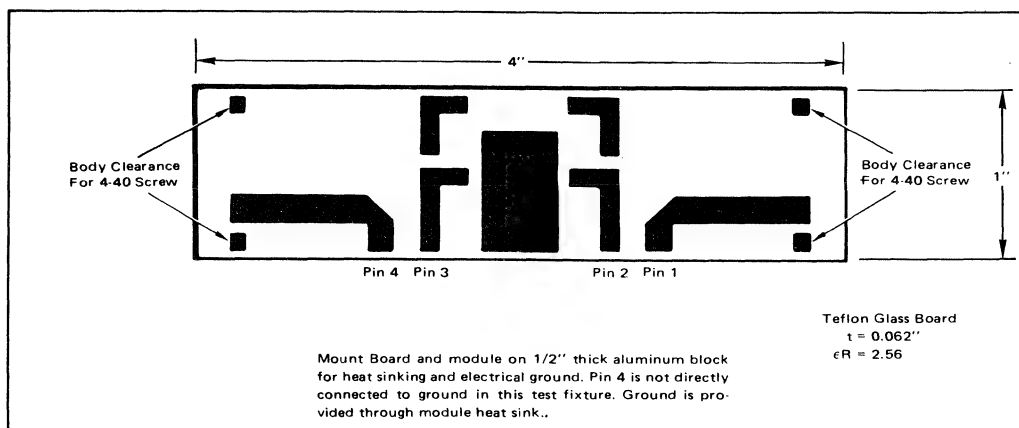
VHF POWER MODULE TEST FIXTURE
